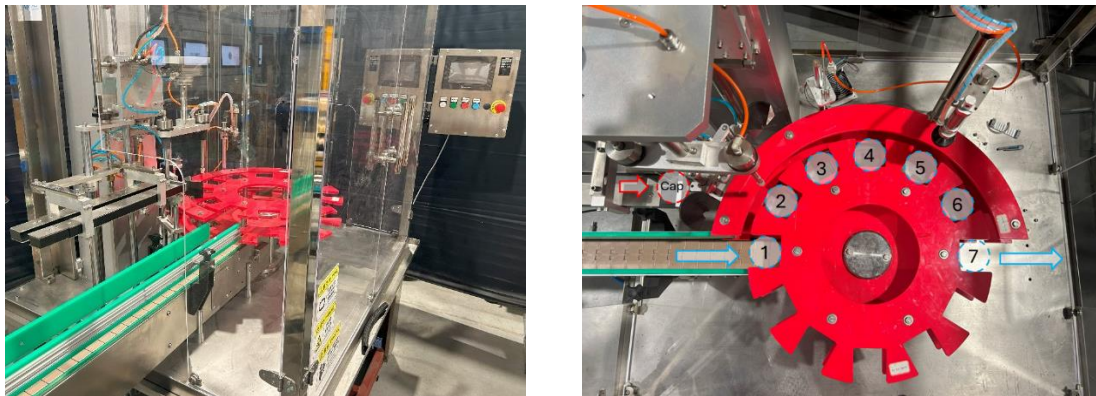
Disinfectant bottle cap assembly machine. Left hand side shows the overview of the machine, Right hand side shows top view of the indexing wheel movement direction.
